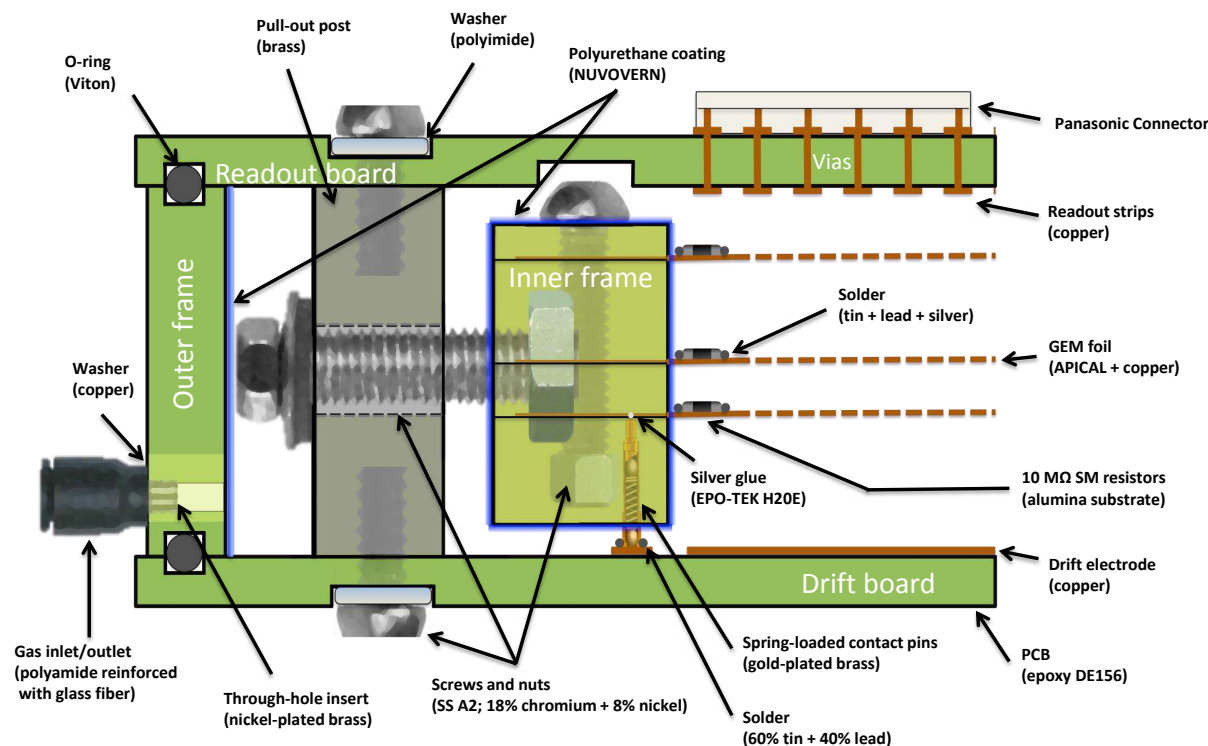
Cross section through inner and outer chamber frames and GEM foils that shows how the GEM foils are mounted within the GE1/1 chamber so that they can be mechanically tensioned against the brass pull-out posts without deforming the drift or readout boards. The materials of all chamber components are specified.
